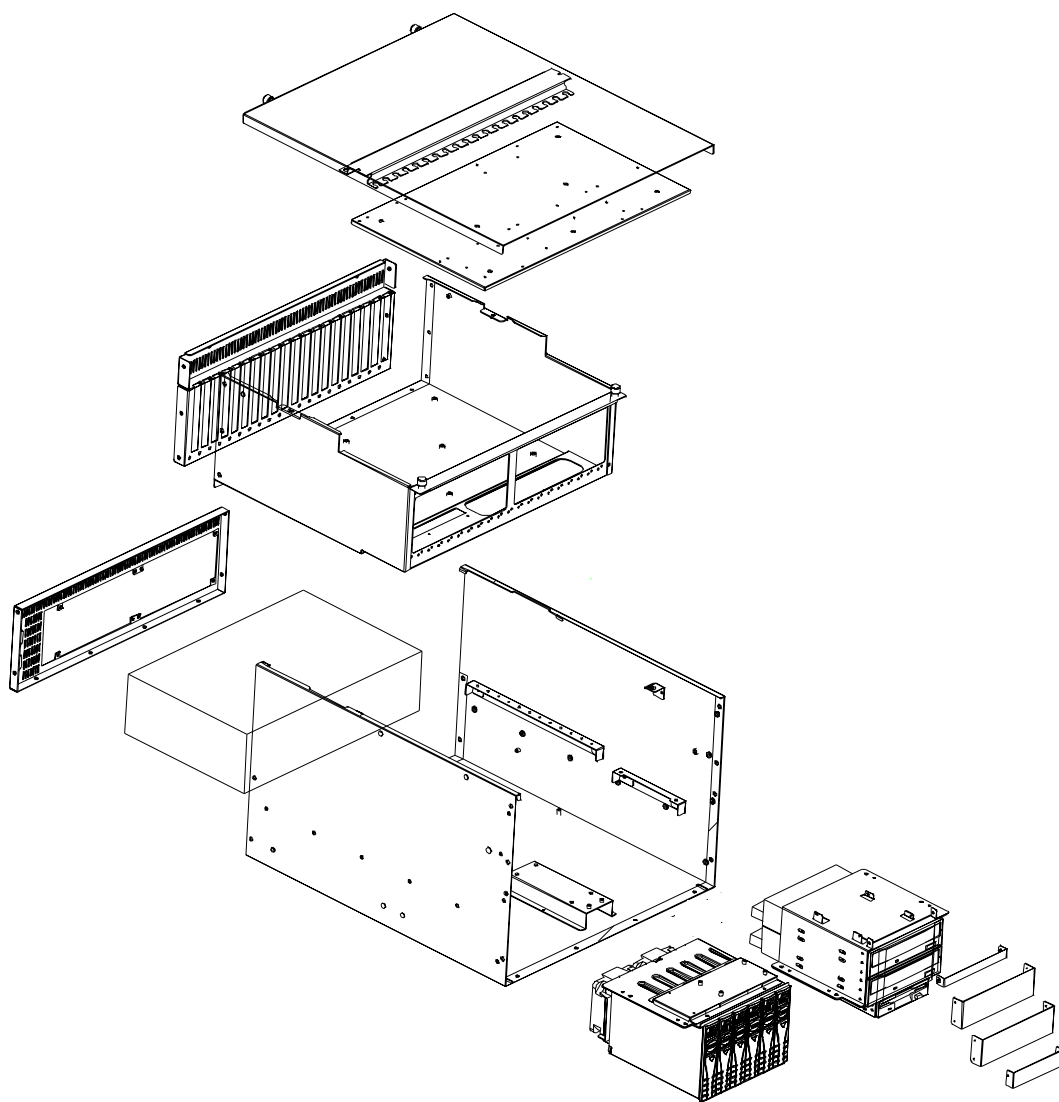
Exploded Diagram 3/ 分解图 3/ 分解圖 3
